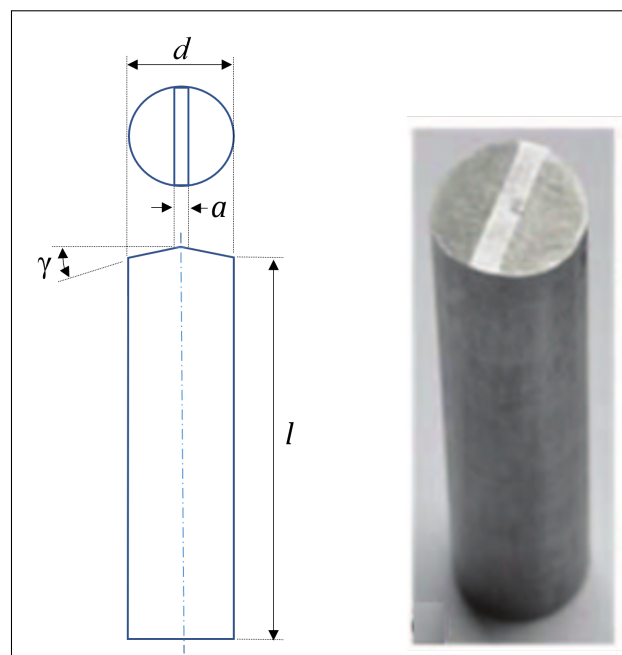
Photo of a real specimen with its geometrical dimensions.
